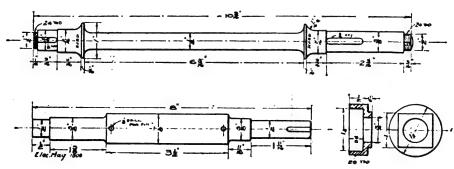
DETAIL OF THE ARMATURE AND COUNTERSHAFTS.
